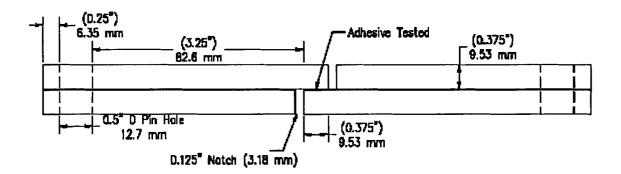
ASTM D 5656 Test Specimen Profile [ASTM 5656]
